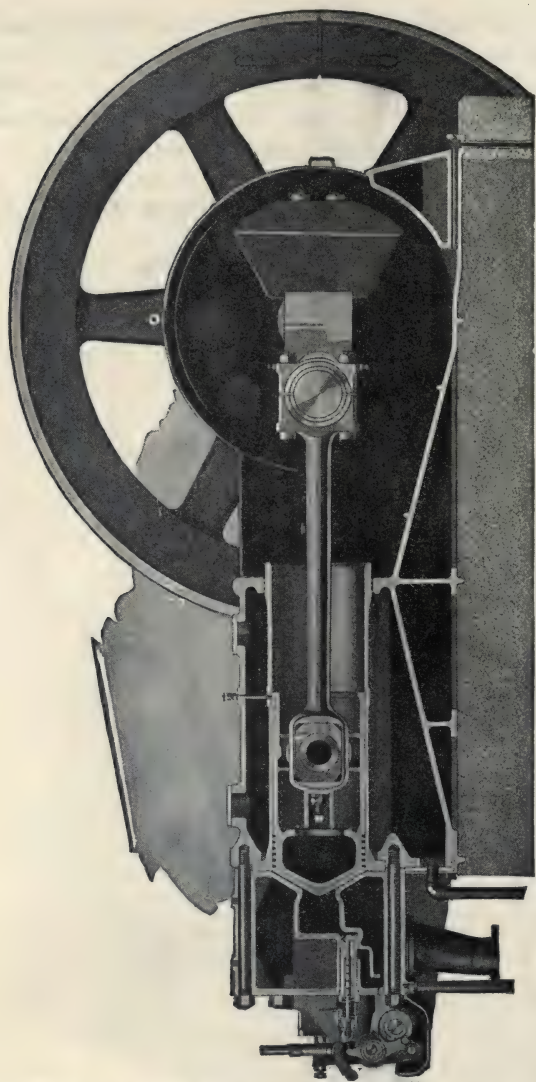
Type "SF" Cross-Sectional View. Note Combustion Space
